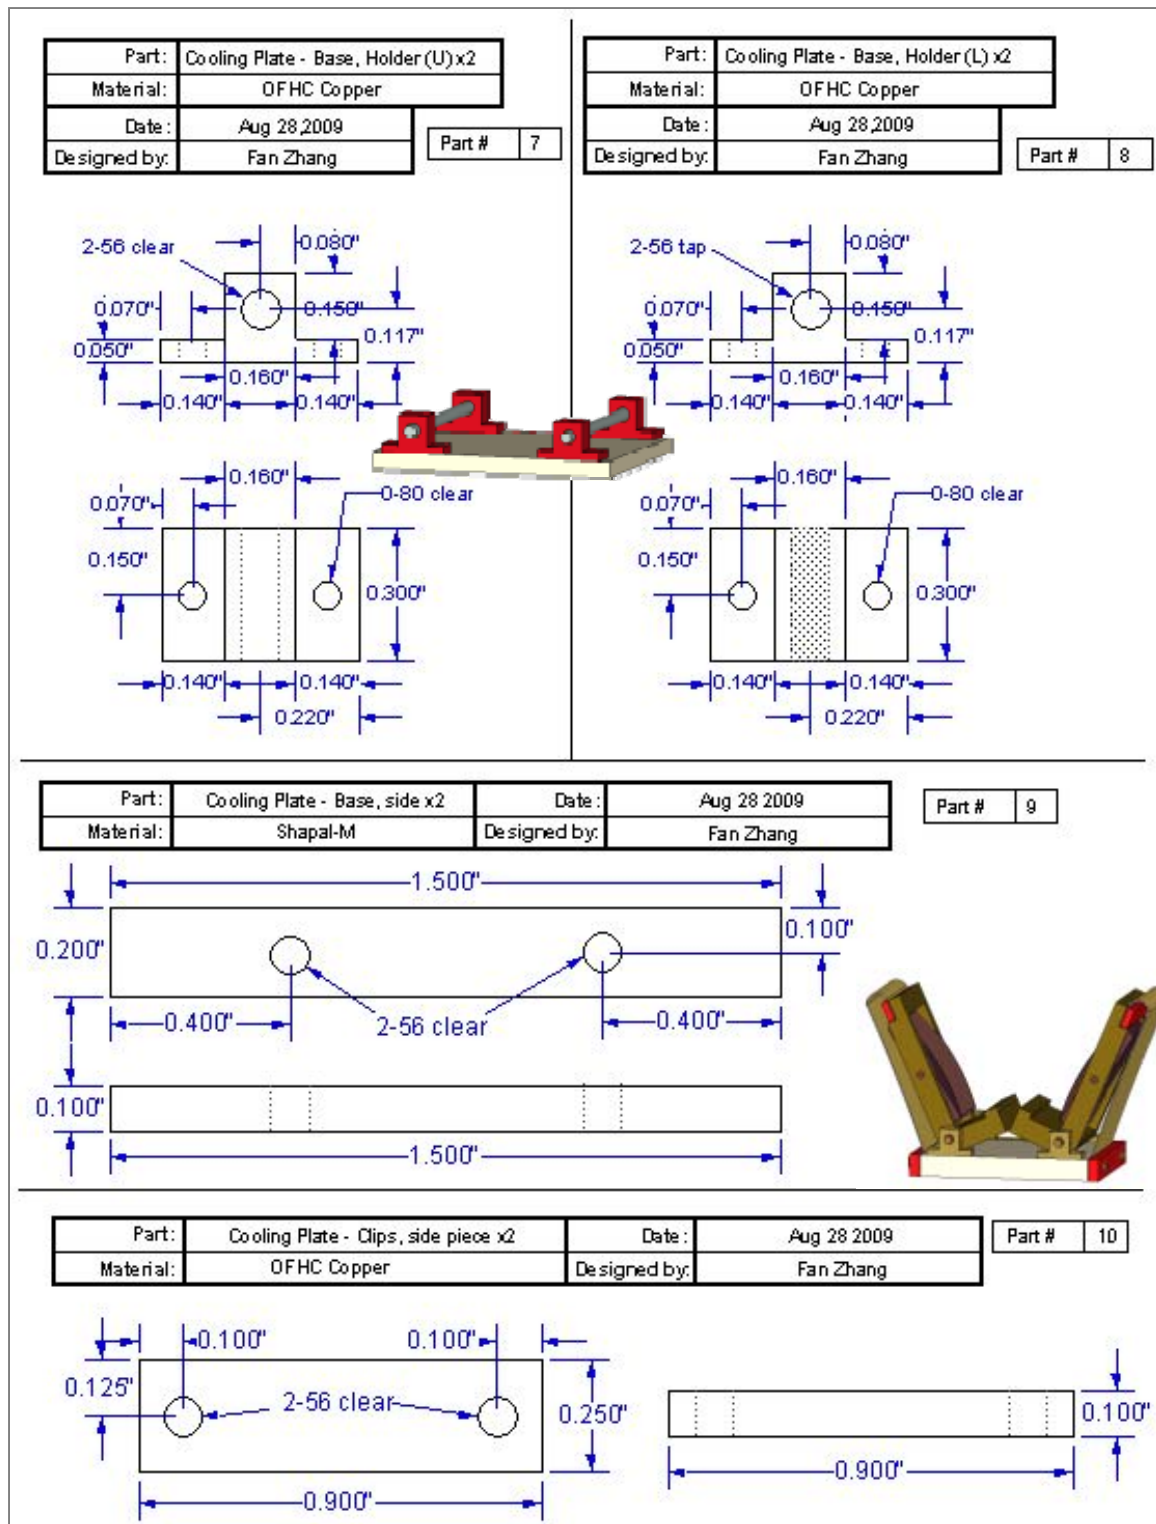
Design specification of the sidepieces. Part #7 & #8: holders of the axes which hold the clips. Part #9: plates to clamp the Be-Cu foils to the sides of the Shapal-M. Part #10: plates to clamp the Be-Cu foils to the top of the clips.
